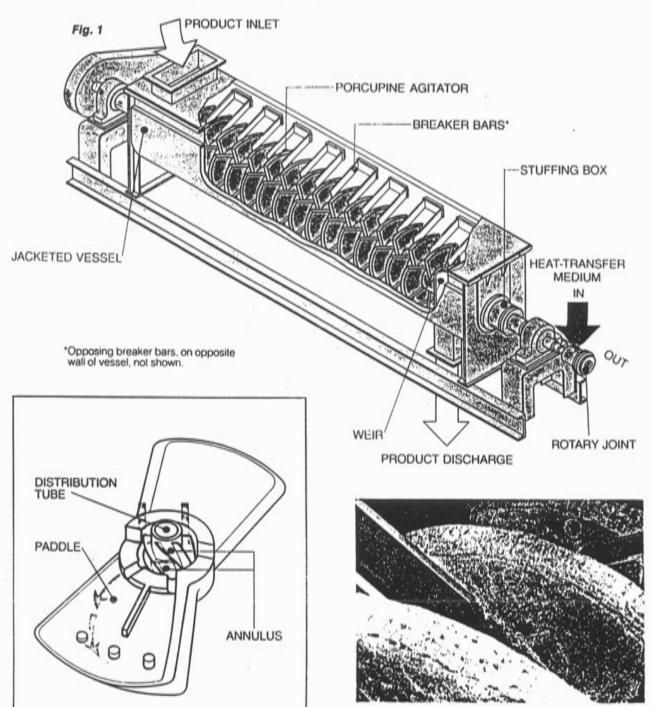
Paddle cutaway indicates flow of heat-transfer medium from paddle to paddle.
